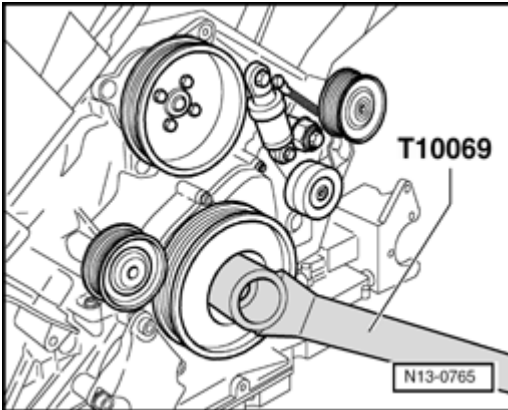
Loosening/Tightening Securing Bolt, Lock Vibration Damper Using Counter-Holder Tool T10069
